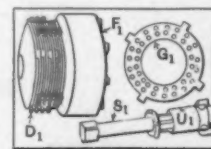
Multiple-disc clutch made up of steel on bronze with cork inserts
